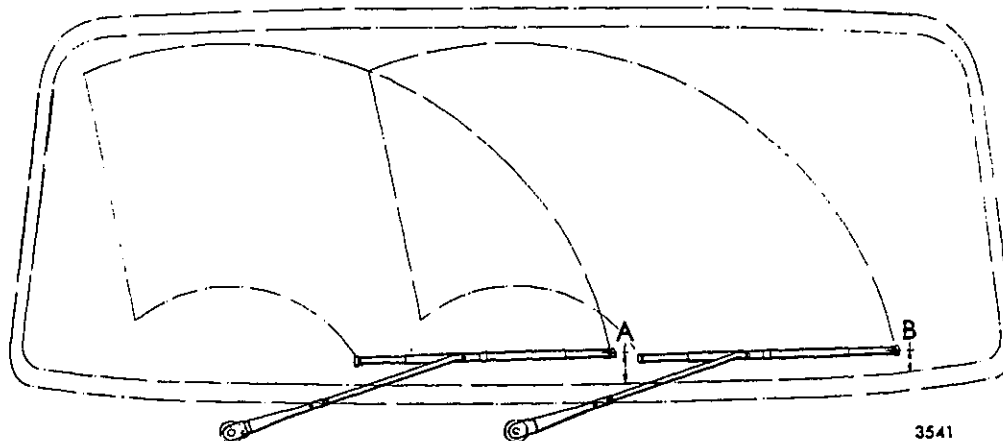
Arrangement of windshield wipers. The arms and blades are shown in the parking position
